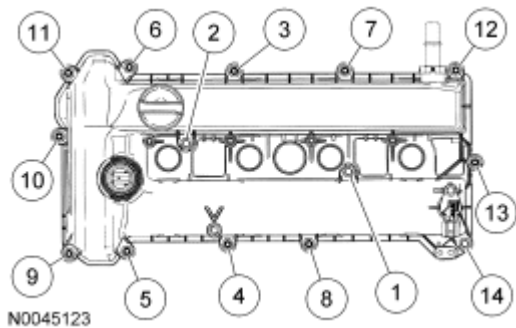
Identifying Valve Cover Bolts Tightening Sequence
